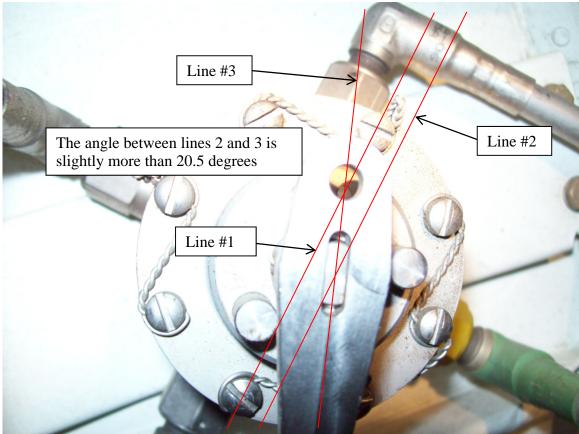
Landing gear selector valve position - Photo 1 w/angles
